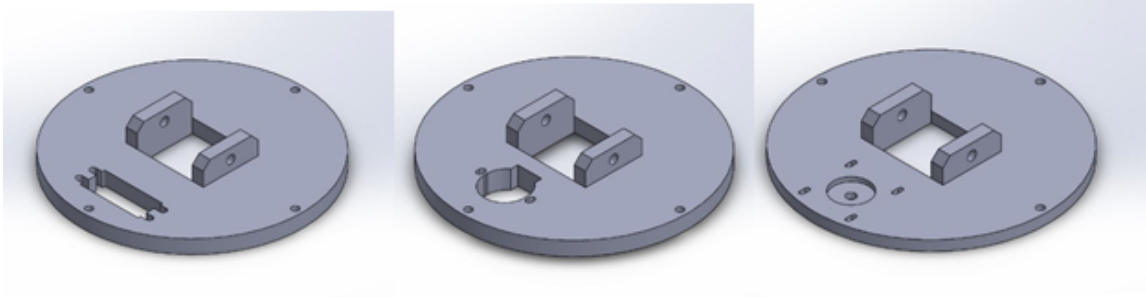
Gearbox Lids for Servo, Small Stepper and Large Stepper Motors
